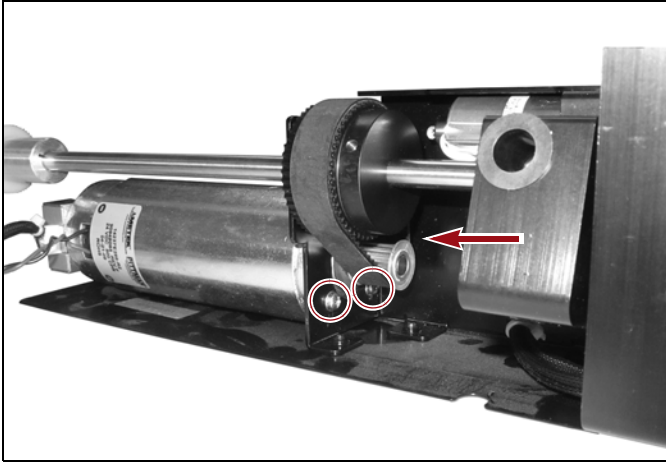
The HAX motor screws. A third screw, behind the motor shaft, is not visible.
